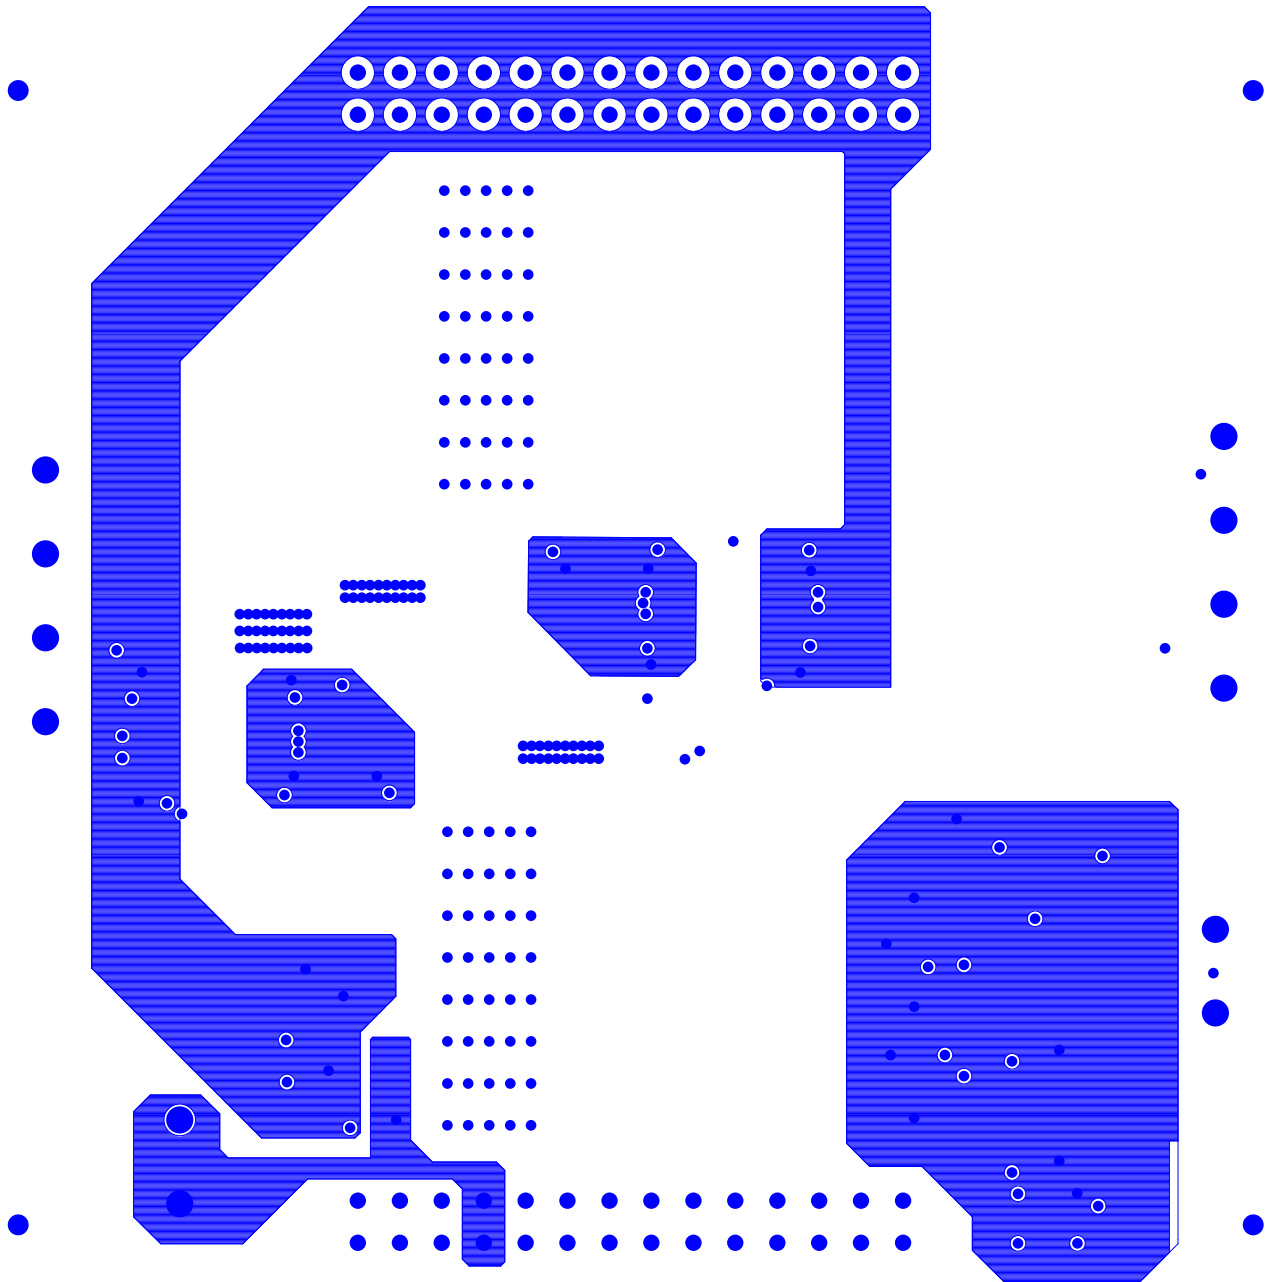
PCB layout inner layer 2 of SSB hardware prototype in Chapter 4.
